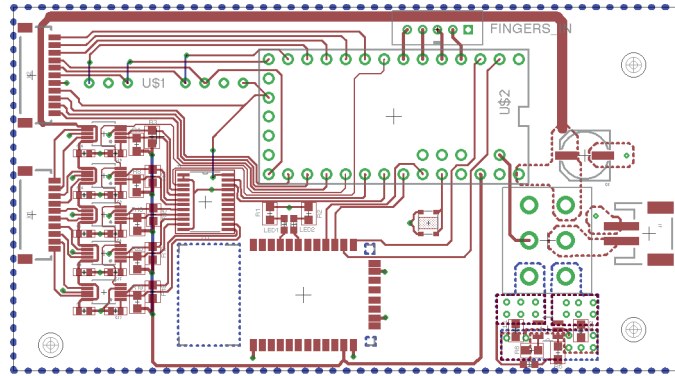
Main Board PCB Layout. 1:1 scale image of the PCB layout for the main board.
